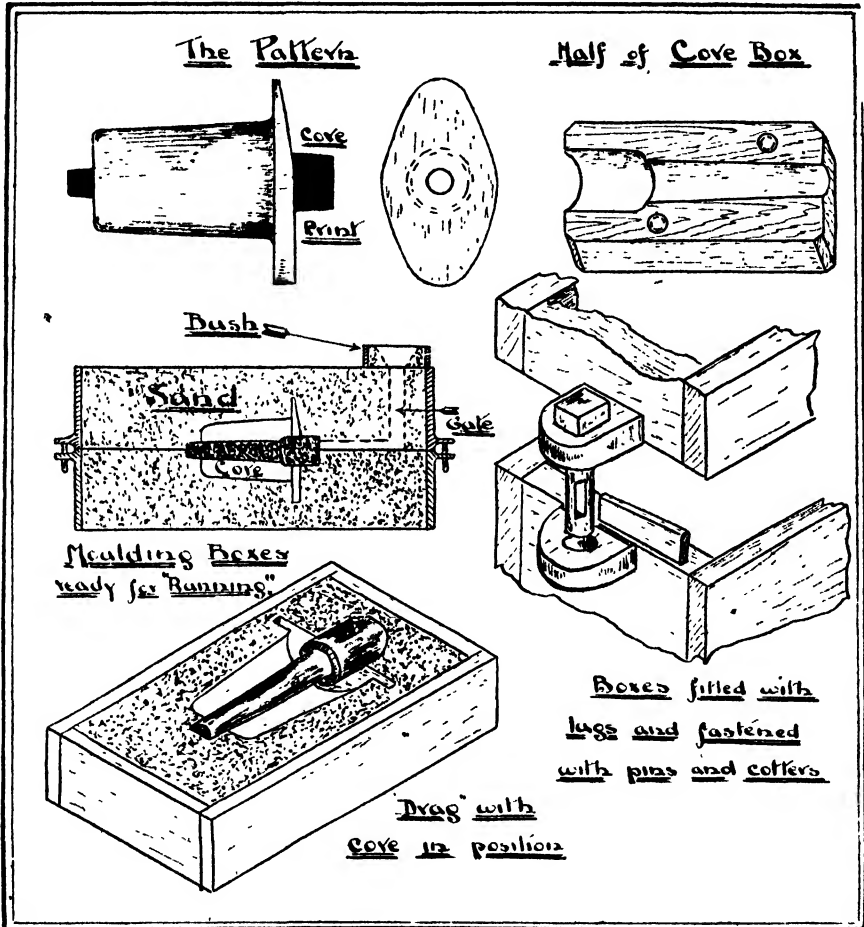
AN EXAMPLE OF FLASK MOULDING A DRY NOZZLE IN CAST IRON.
